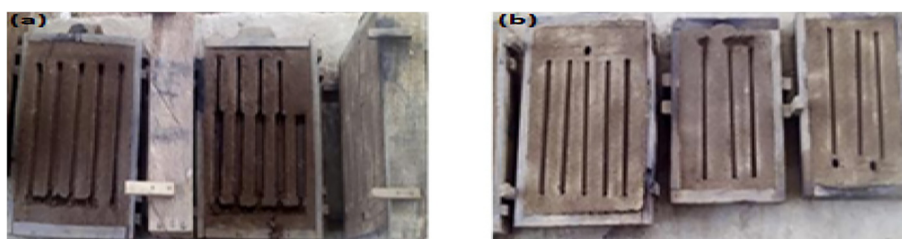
Mould box for samples: (a) impact and hardness tests; (b) tensile test.
